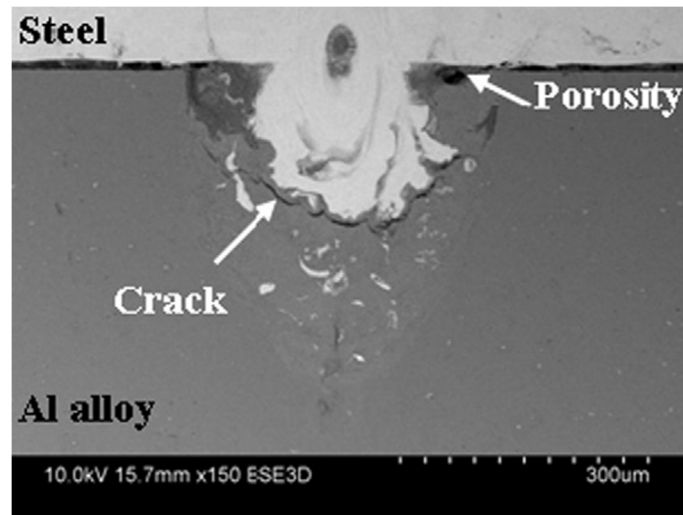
Macrostructure of Zn coated Steel over aluminium weld showing porosity [19].
